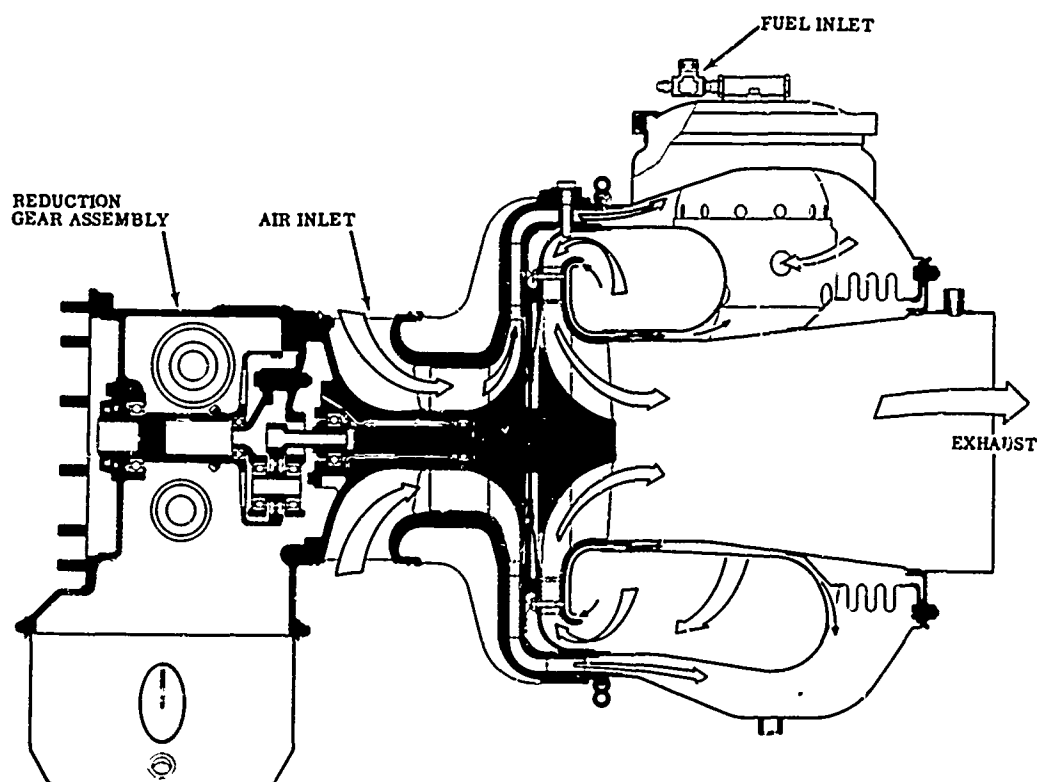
T-350 GAS TURBINE ENGINE CROSS SECTION
